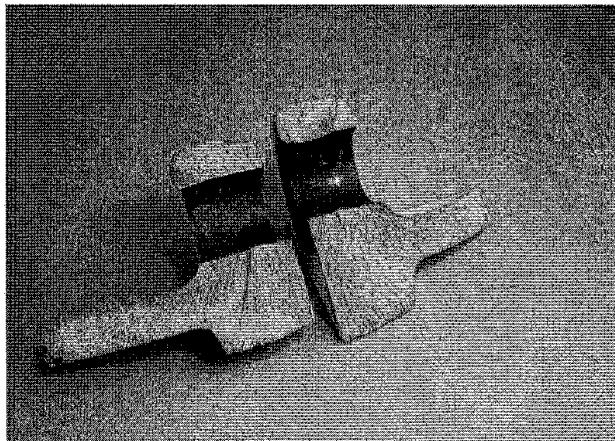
Fracture surfaces "A" and "B" as received. Note that they are not from the same fracture.
